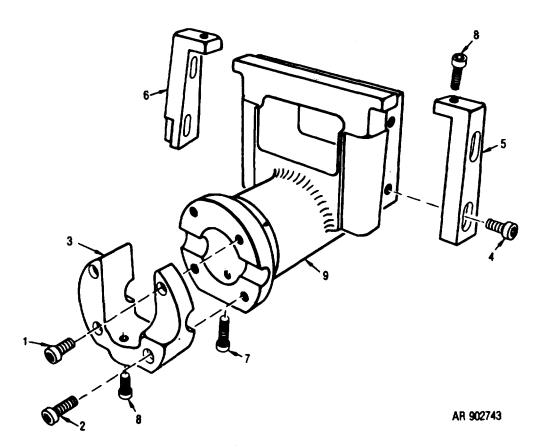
Adapter assembl	ly for M102 - exploded view
